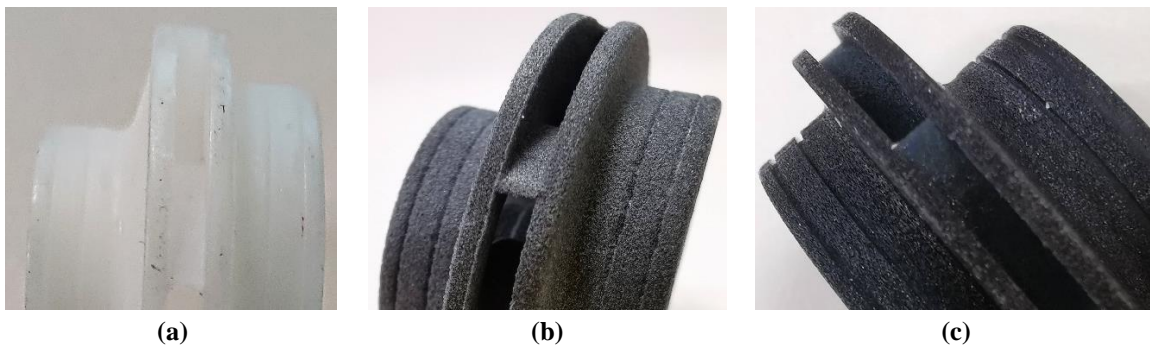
Images of SLS manufactured parts for (a) closed impeller, (b) volute and (c) volute channel
